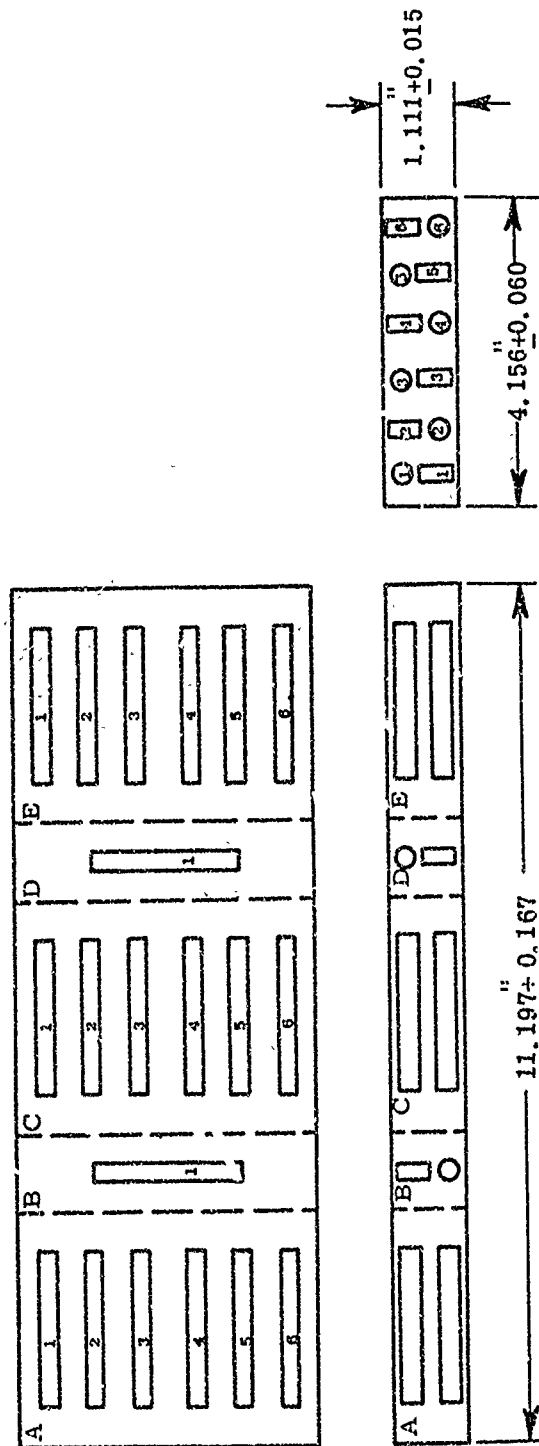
Configuration of Specimen Blank 4All-089 as Received from Coors and Cutting Plan for Removing Phase I Macro Tensile and Macro Flexural Specimens
